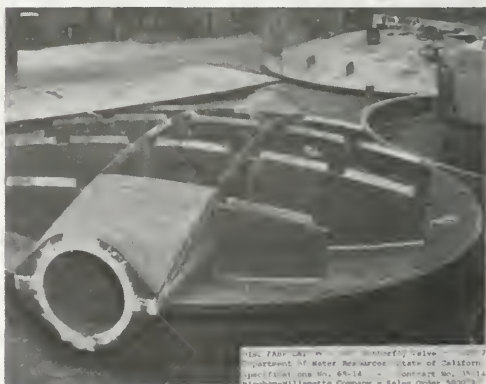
Fabrication of Disc for 168-Inch Butterfly Valve
